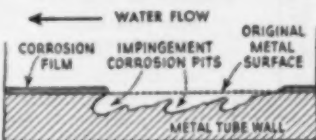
Section through wall of tube shows how impingement of stream removes corrosion film and corrodes base metal to form crescent-shaped pits.
